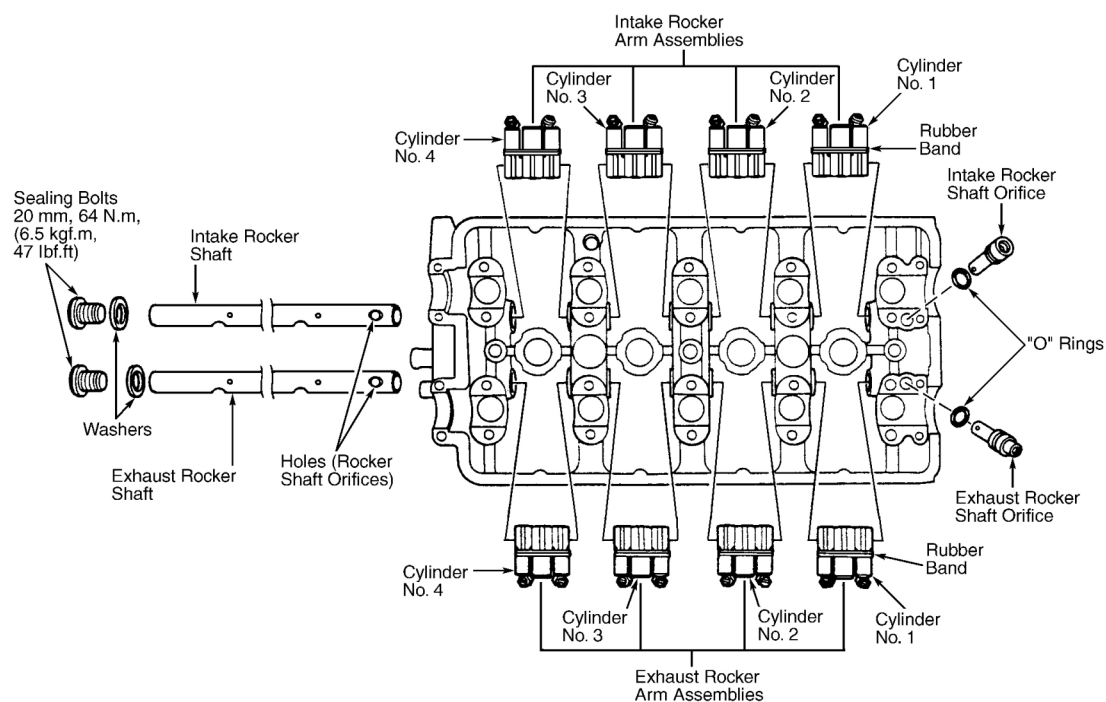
Identifying Rocker Arm Assembly Components (D16Y7 Engine)
